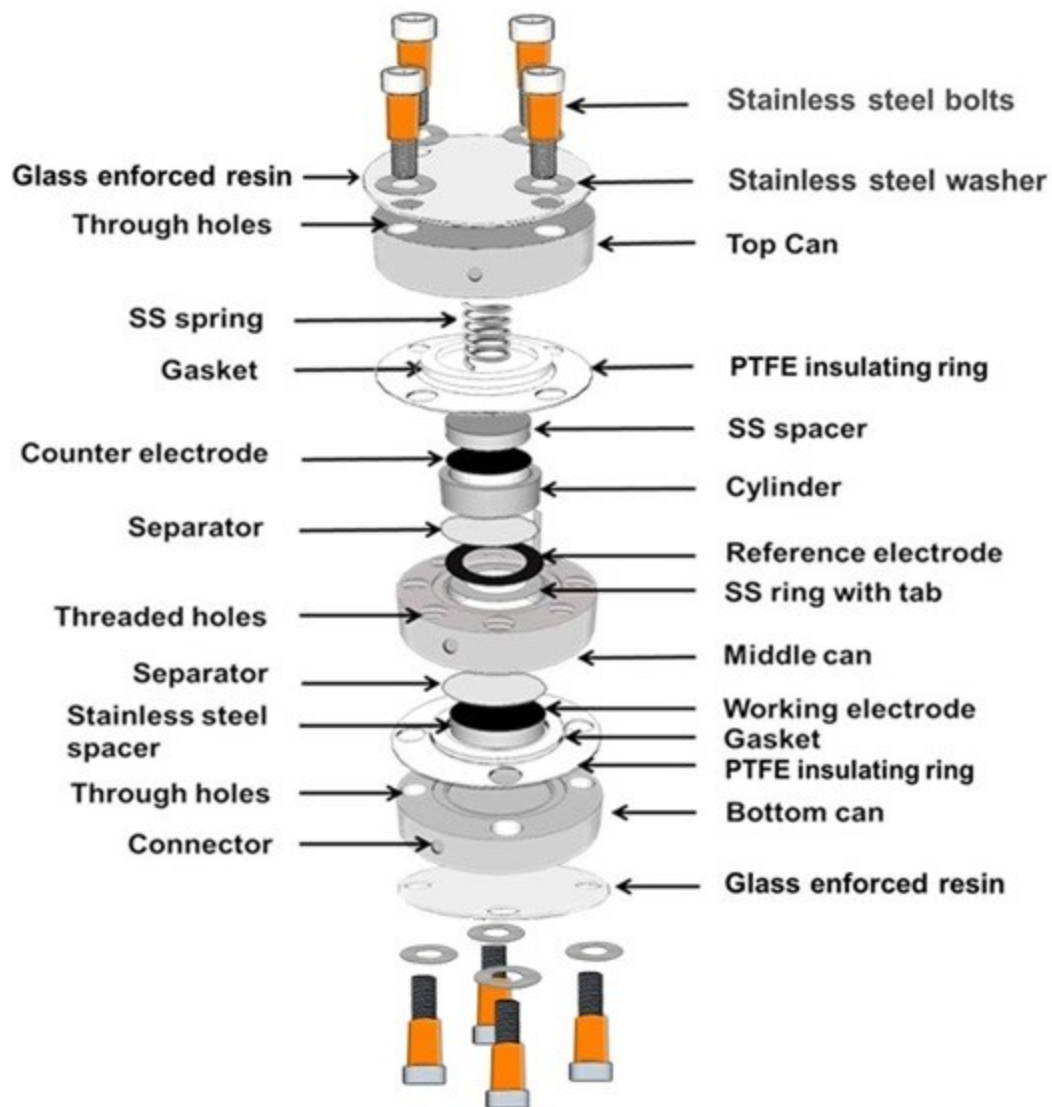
(a): Exploded view of a 3-electrode Conflat cell.
